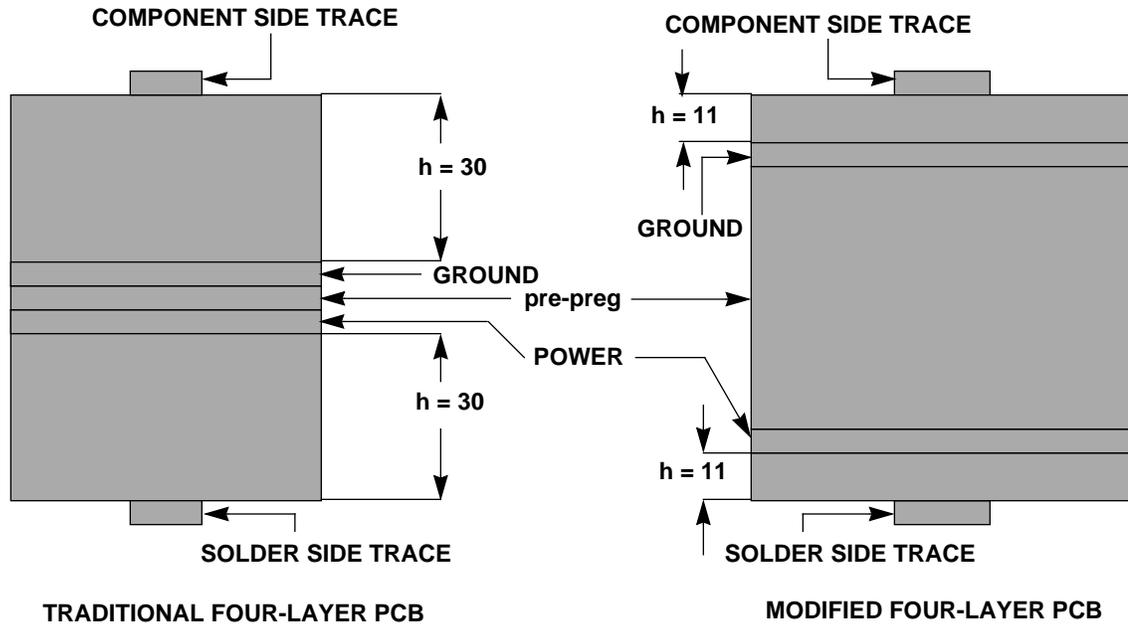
Four-Layer PCB Fabrication (Not to Scale)
